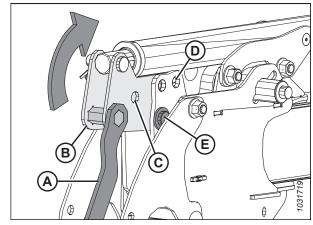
Fore-Aft Cylinder Adjustment Type 1 – Forward Position
